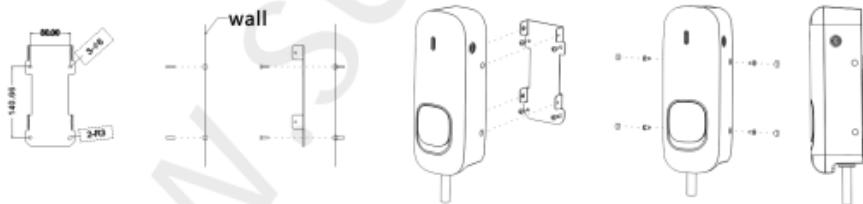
Wall-mounted installation procedures of Mode A charging station
